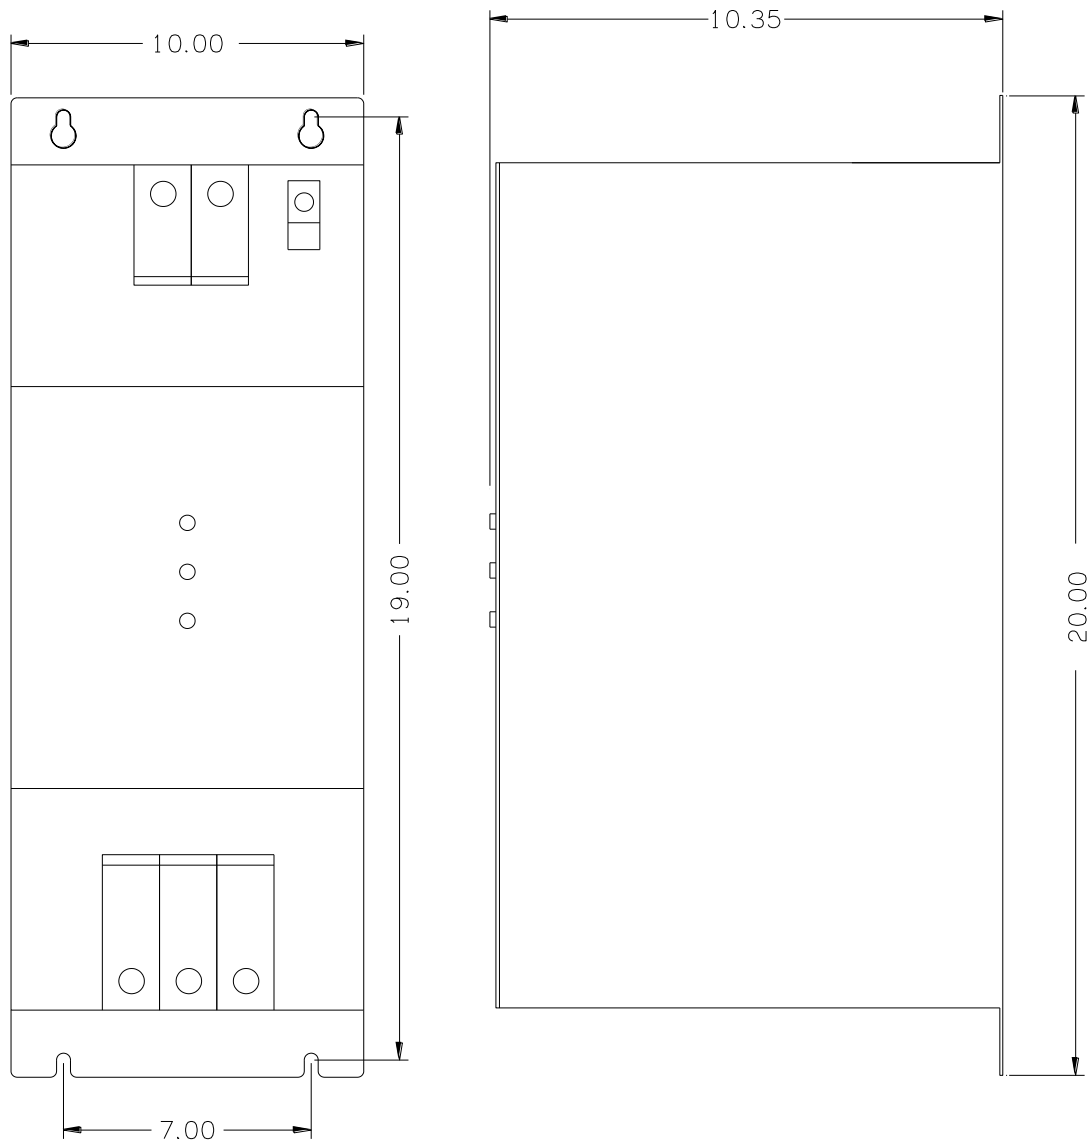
M3713SC K10 Chassis Dimensional Outline
